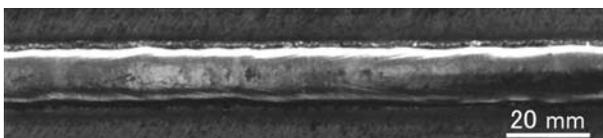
Bead appearance of G-50 / US-36 in a double-side single-pass weld (6-mm thick mild steel base metal; I-butt joint; 4-mmØ wire; 450A-33V-650 mm/min for 1st pass; 550A-33V-700 mm/min for 2nd pass).
